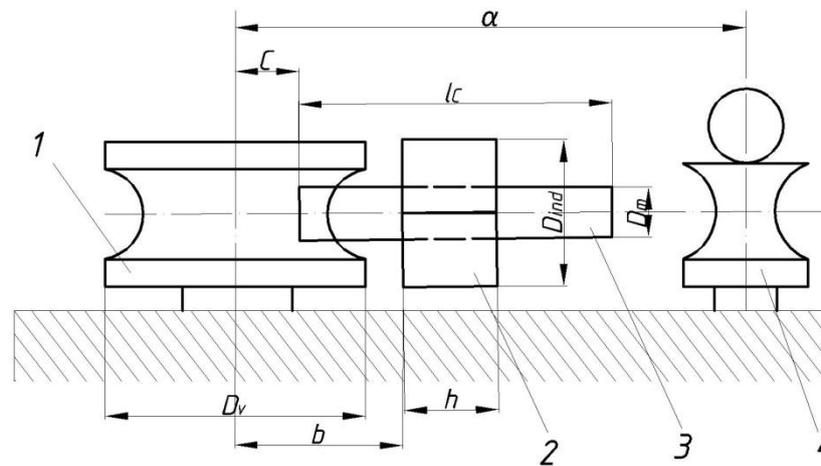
The scheme of the welding machine of the mill of high-frequency welding of longitudinal pipes:
